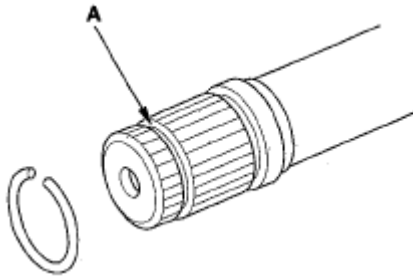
Identifying Stop Ring In Driveshaft Groove
